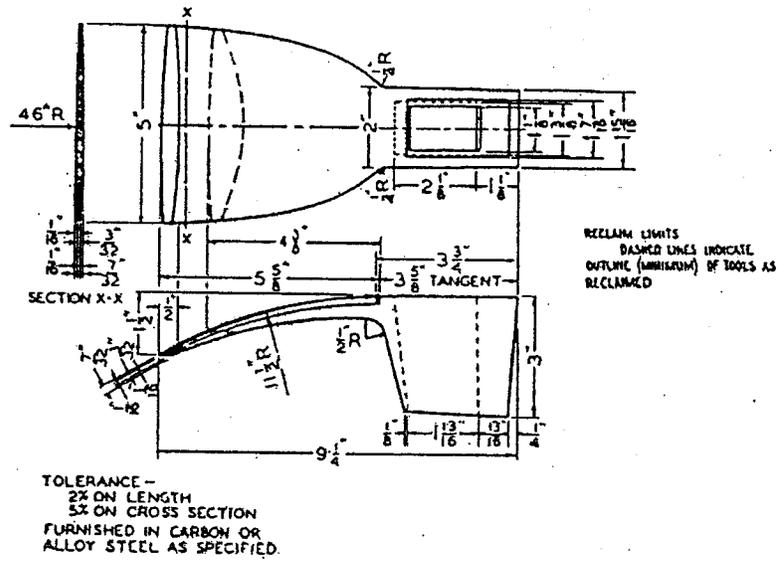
Plan 12A-62 - AREMA Carpenter's Adz
